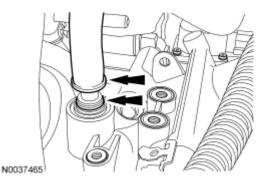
Locating Locking Ring And Brake Booster Vacuum Supply Tube Courtesy of FORD MOTOR CO.
